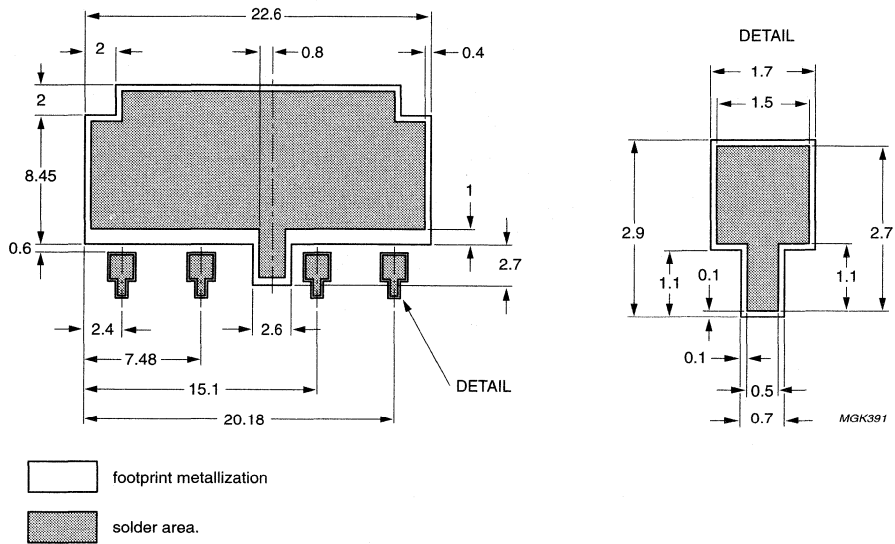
Reflow soldering footprint for SOT421 (not suitable for wave soldering).
